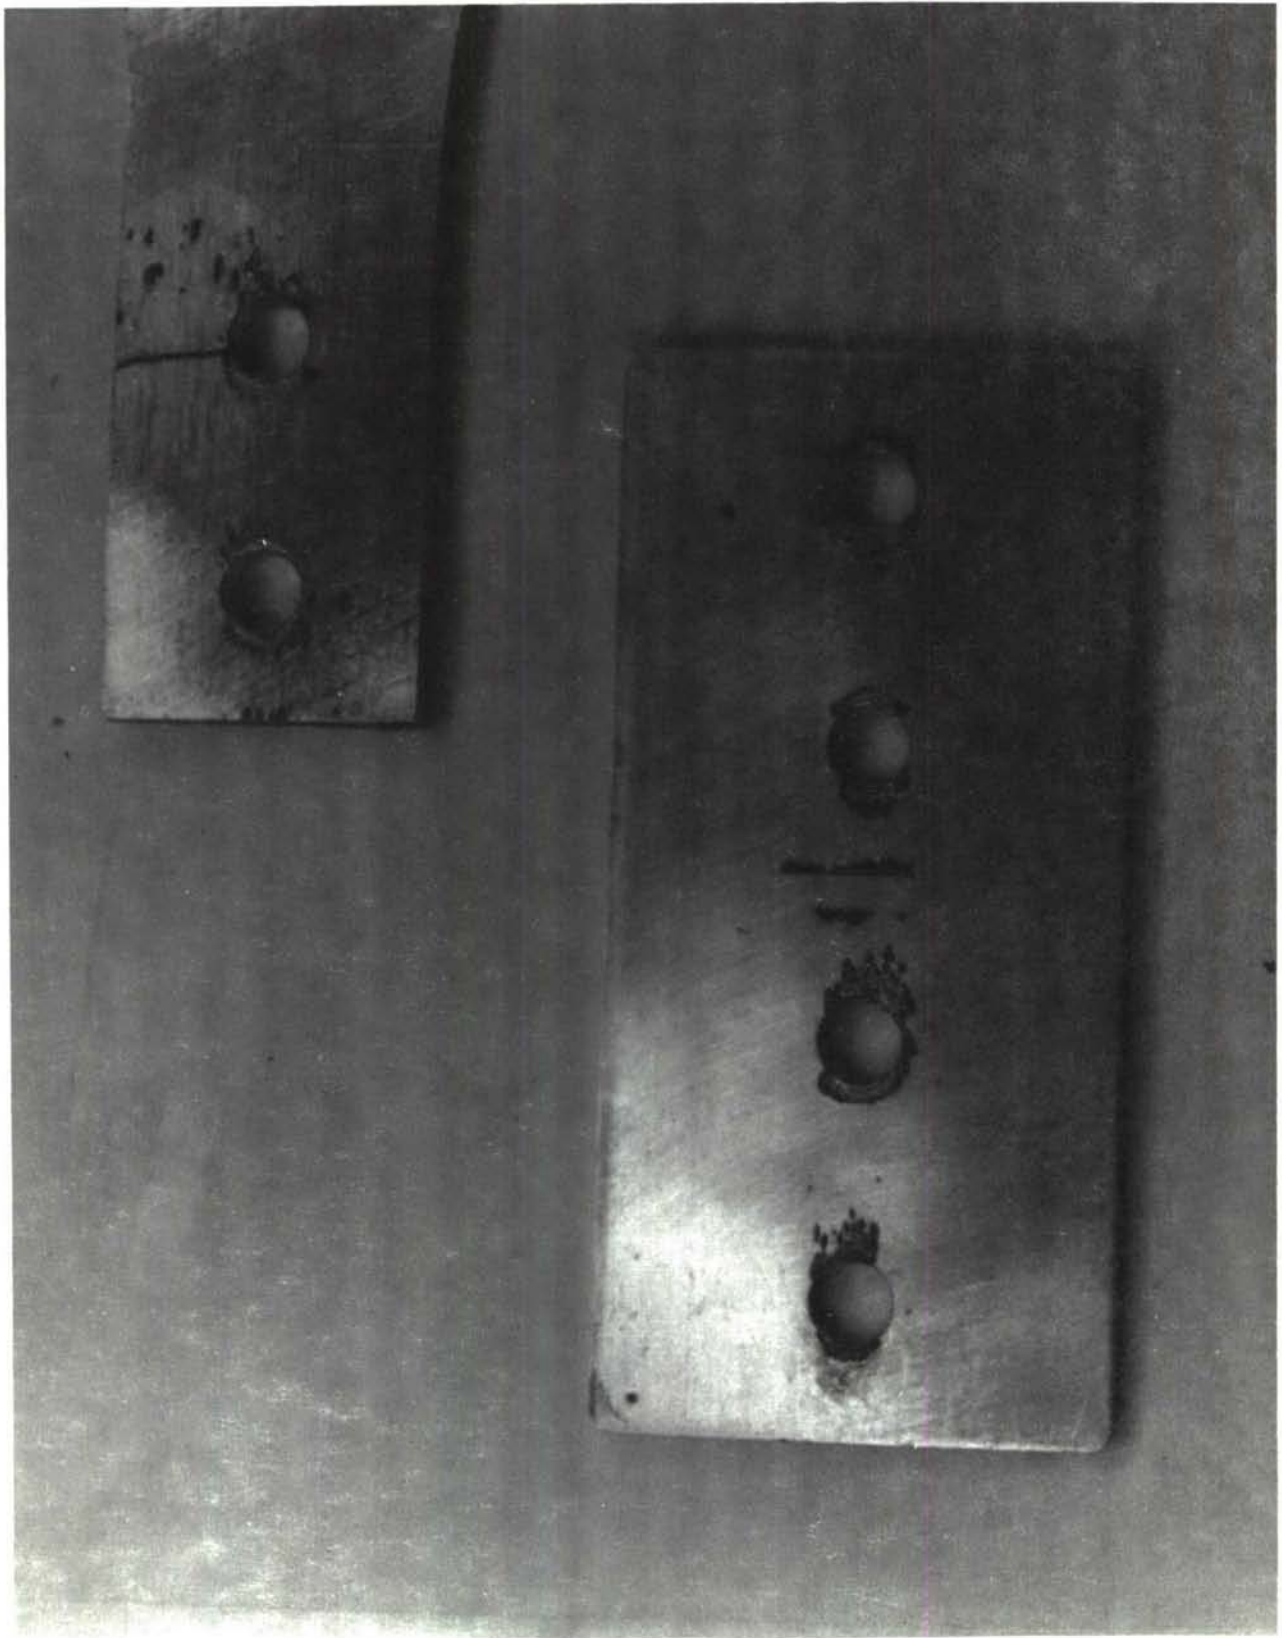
Failed 4 Bolt Joint Specimen and Splice Plate. Pitting Around Holes and at End of Part is Due to Fretting.
